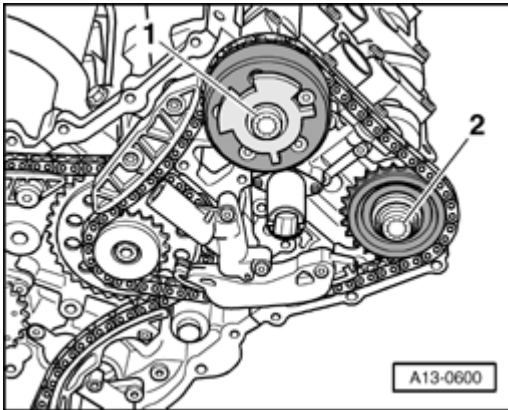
Removing/Installing Bolts For Camshaft Chain Sprocket Or Camshaft Adjuster Using Multipoint Socket T10035
